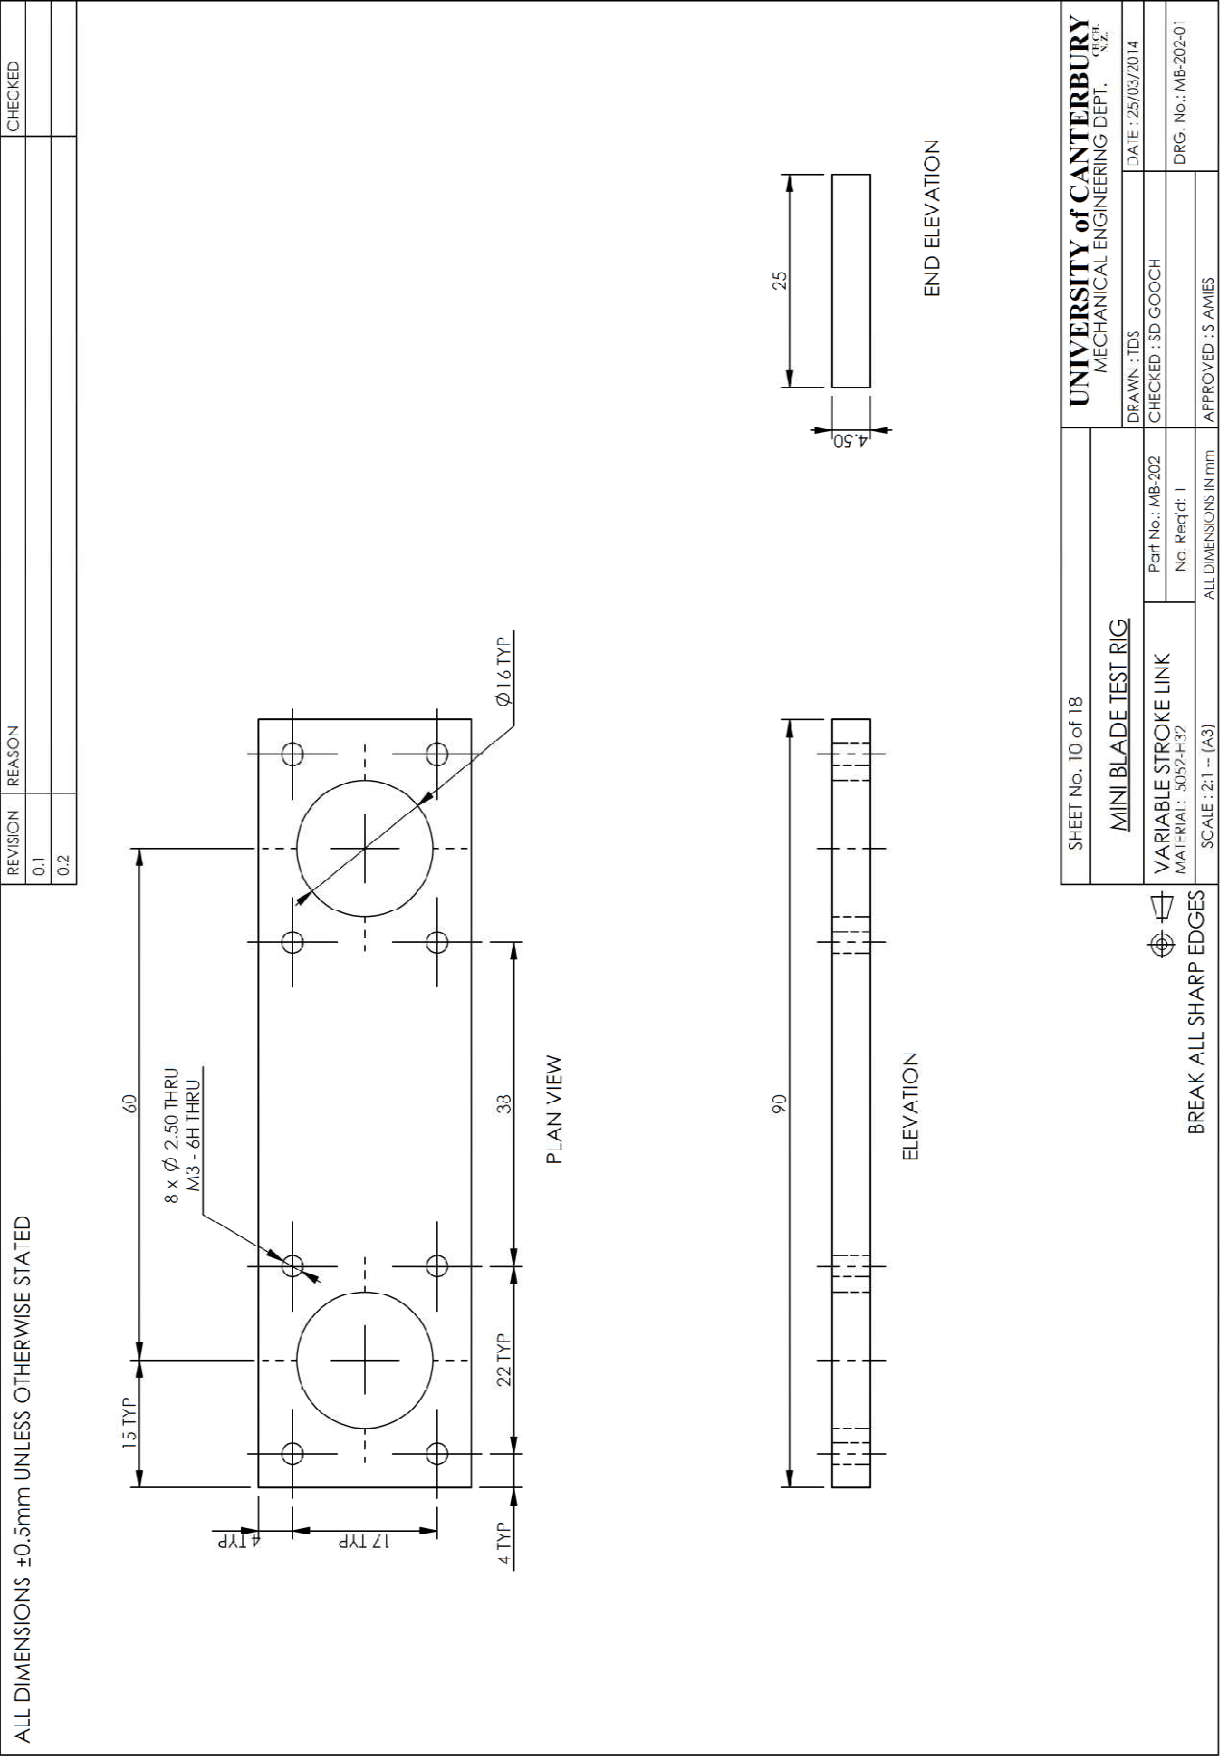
Manufacturing drawing for link 1 of the variable stroke test rig.
